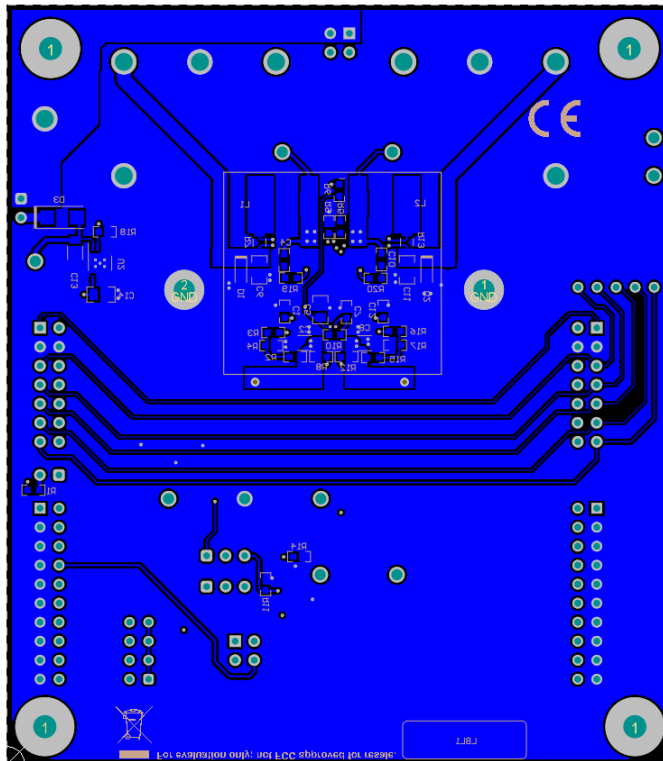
TPS92520EVM-133 Bottom Layer and Bottom Overlay (Bottom View)
